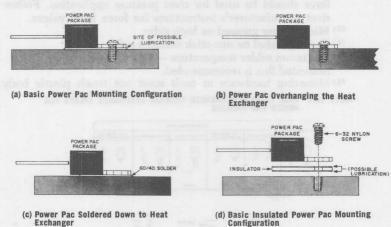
STANDARD POWER PAC PACKAGE MOUNTING CONFIGURATIONS
